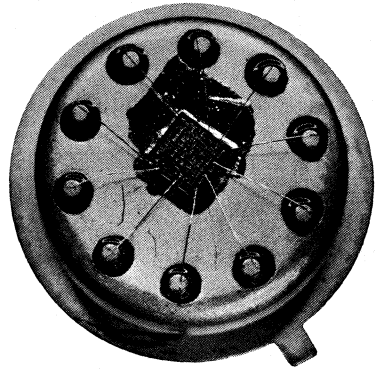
Integrated-circuit chip mounted in TO-5-style package assembly.
